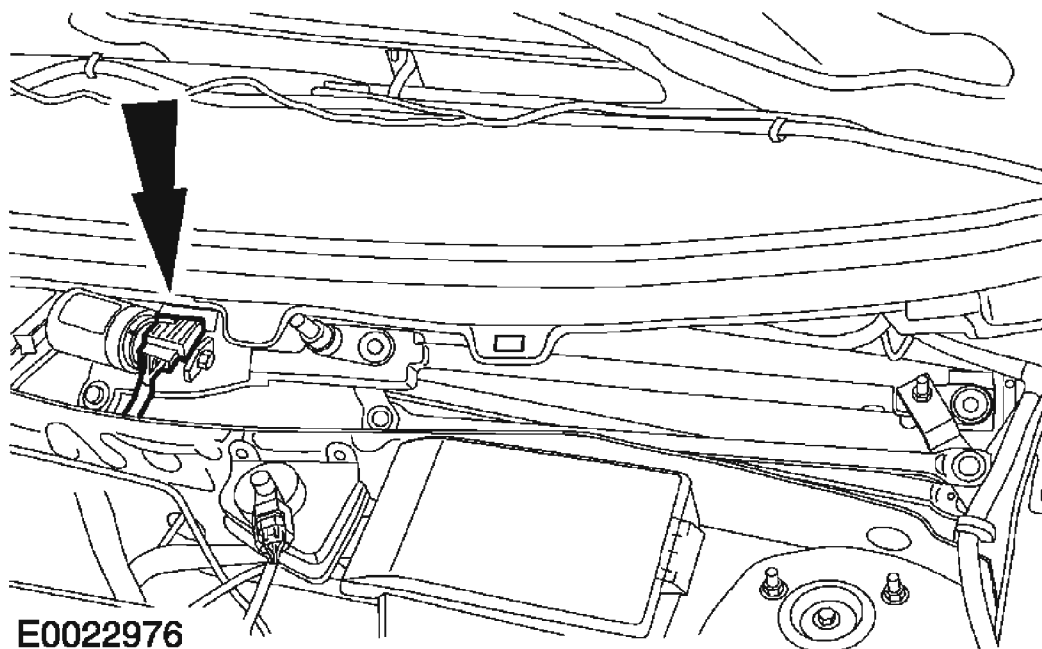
Disconnecting Windshield Wiper Motor Electrical Connector
